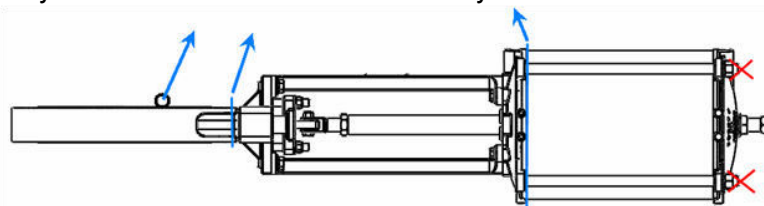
Knife Gate Valve with Pneumatic Cylinder Actuator, Horizontal Lifting
